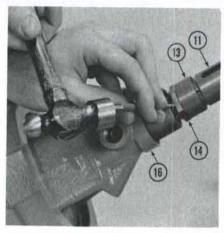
After installing steering shaft on Hydramotor actuator shaft, stake hex nut to slot in steering (11) with center punch.
